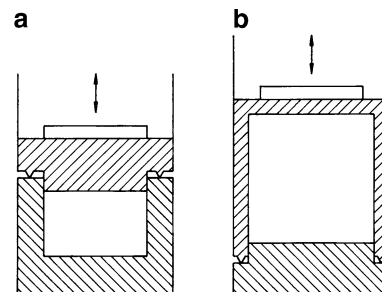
Ultrasonic welding. a near field welding; b far field welding, after [7] (courtesy S. Hirzel Verlag)
